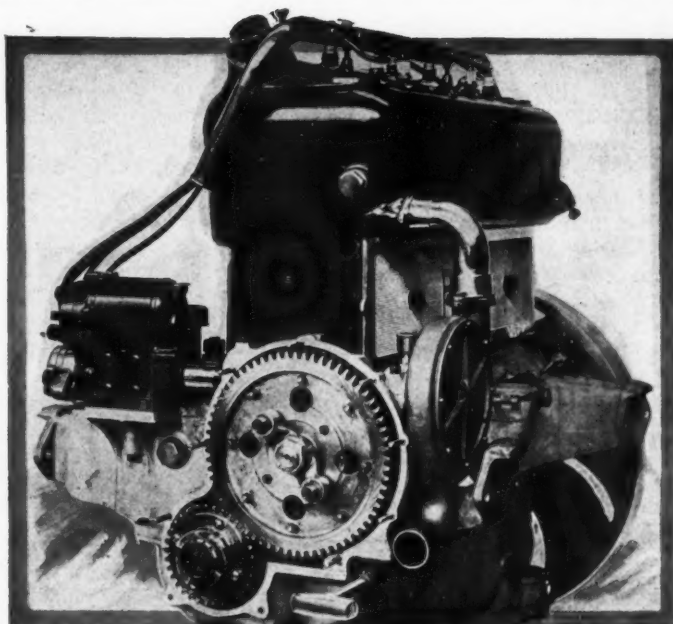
Timing gears and magneto mounting of the new Fiat motor
